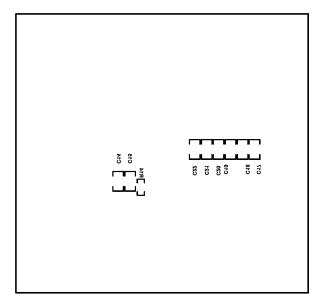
TPS53317AEVM-726 Bottom Assembly Drawing (Bottom View)
